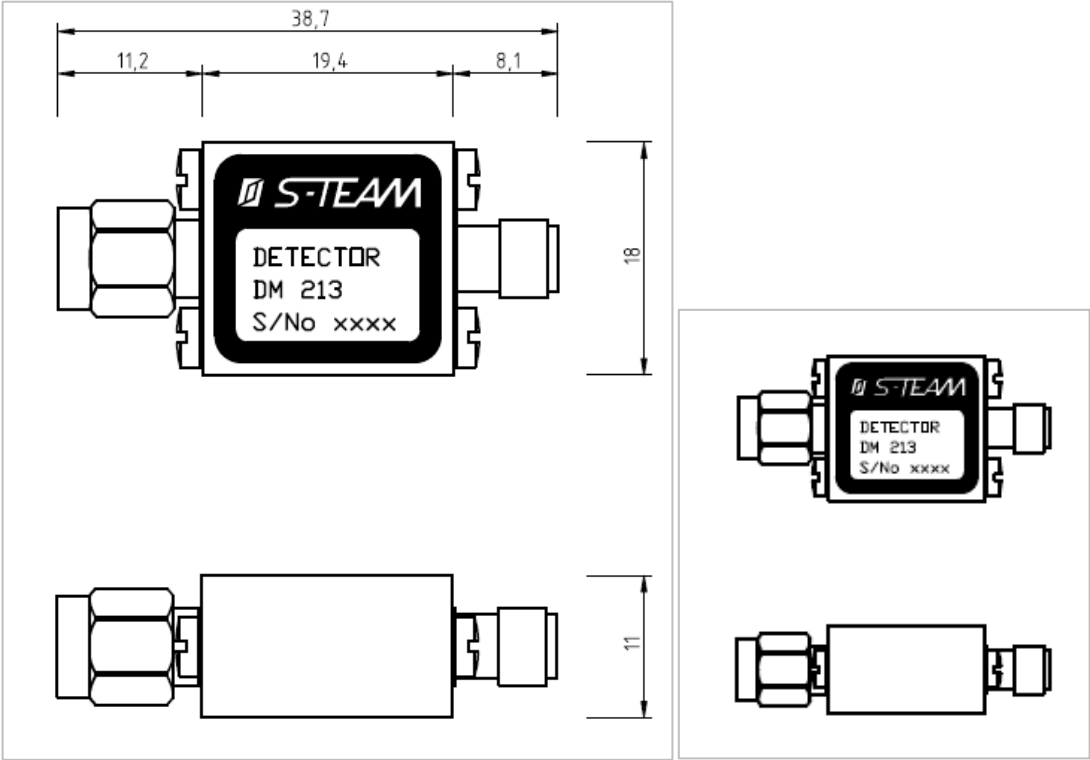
Basic DM313 dimensions in millimeters (the dimensions are the same as for the DM213 shown). Right: Actual size.
